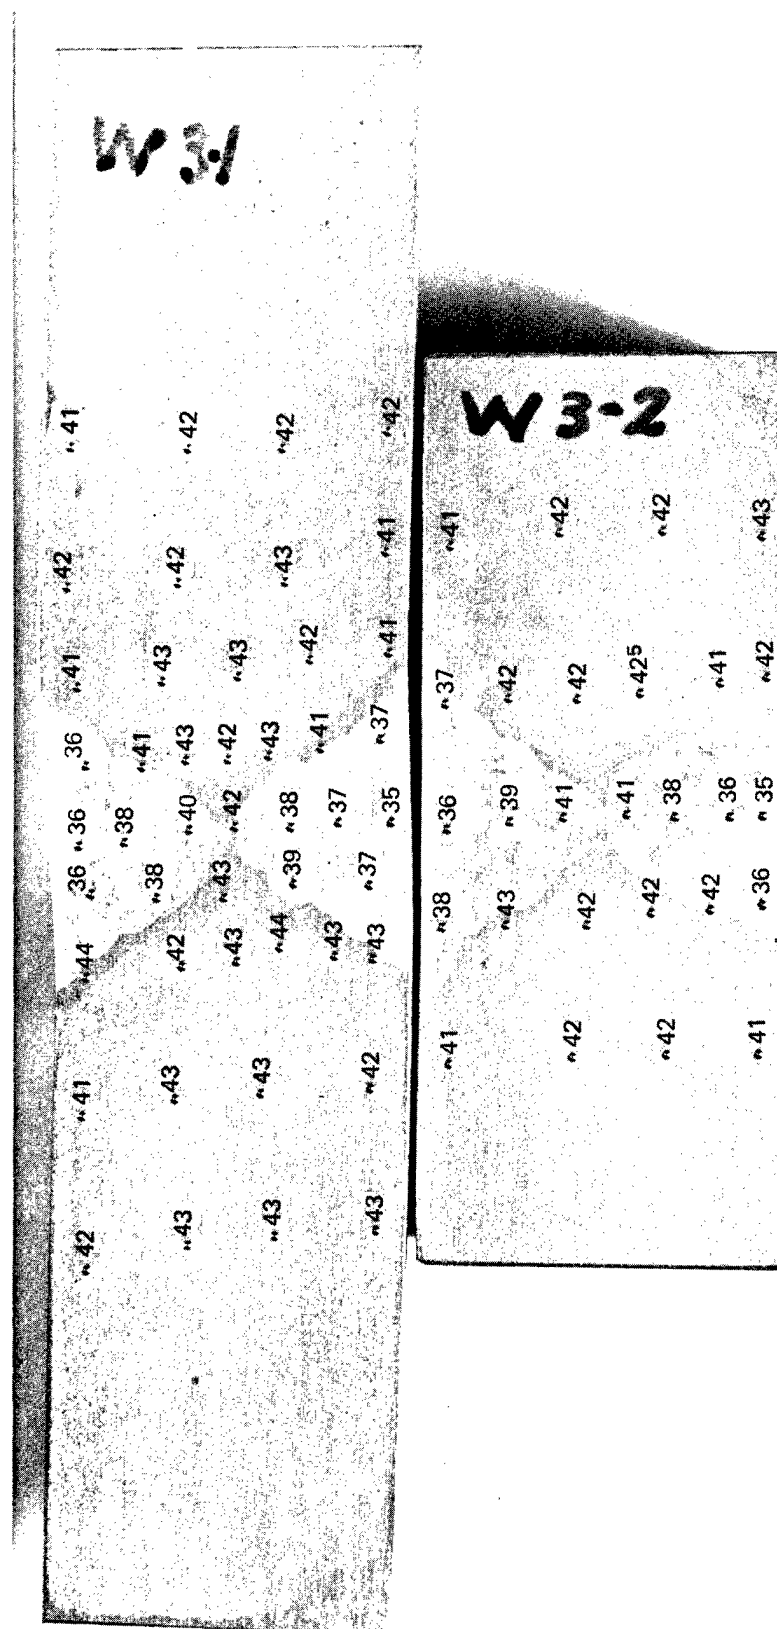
Macroetched cross sections from double-U Inconel alloy 718 weldment annealed (furnace cool) and aged after welding. Numbers beside the indentations are Rockwell C hardness values. (Neg. P67-8-33M)
